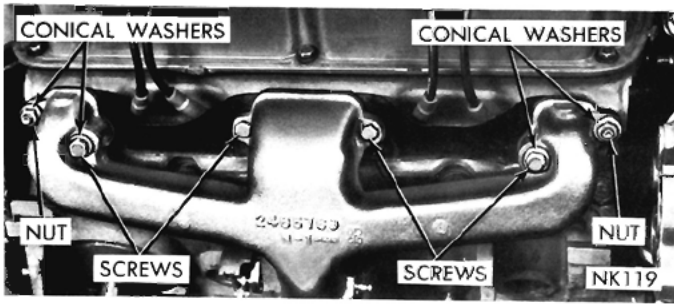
Intake Manifold (273 Cu. In. Engine)
